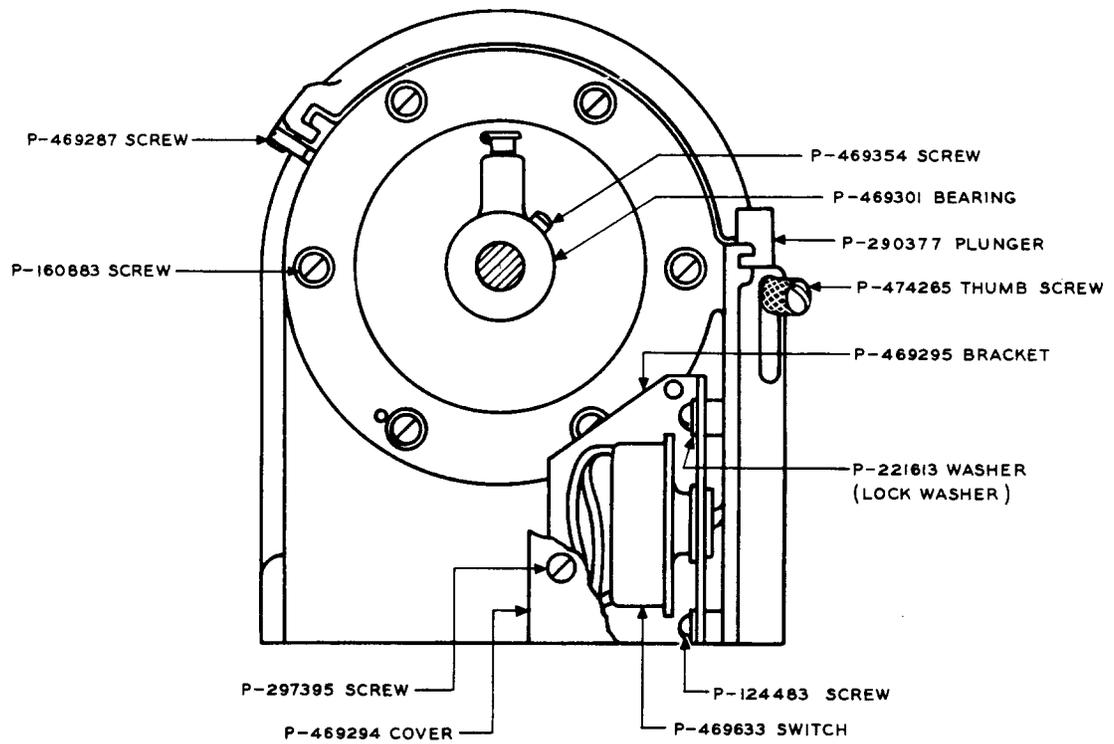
Toggle Switch and Parts Associated with the Gear End of the Cleaner Housing
